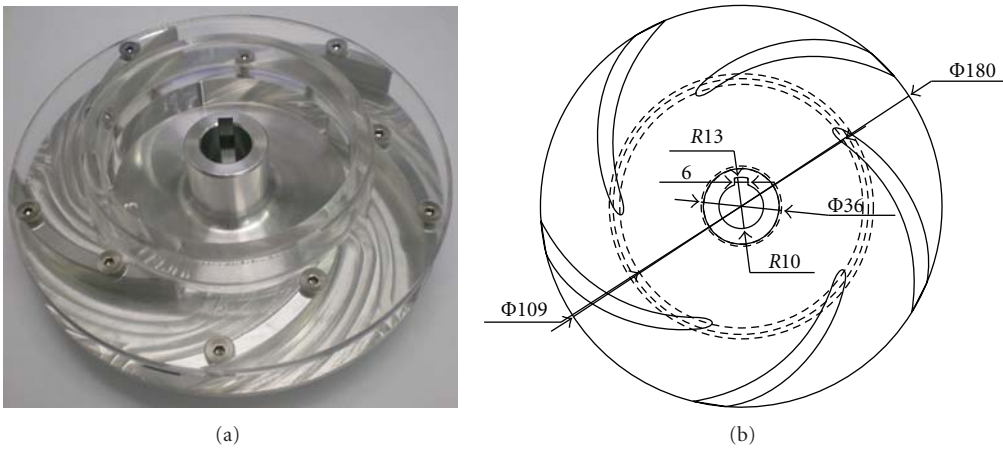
The examined impeller geometry and the scaled drawing (in mm) with blade leading edge angle of 21 deg.
